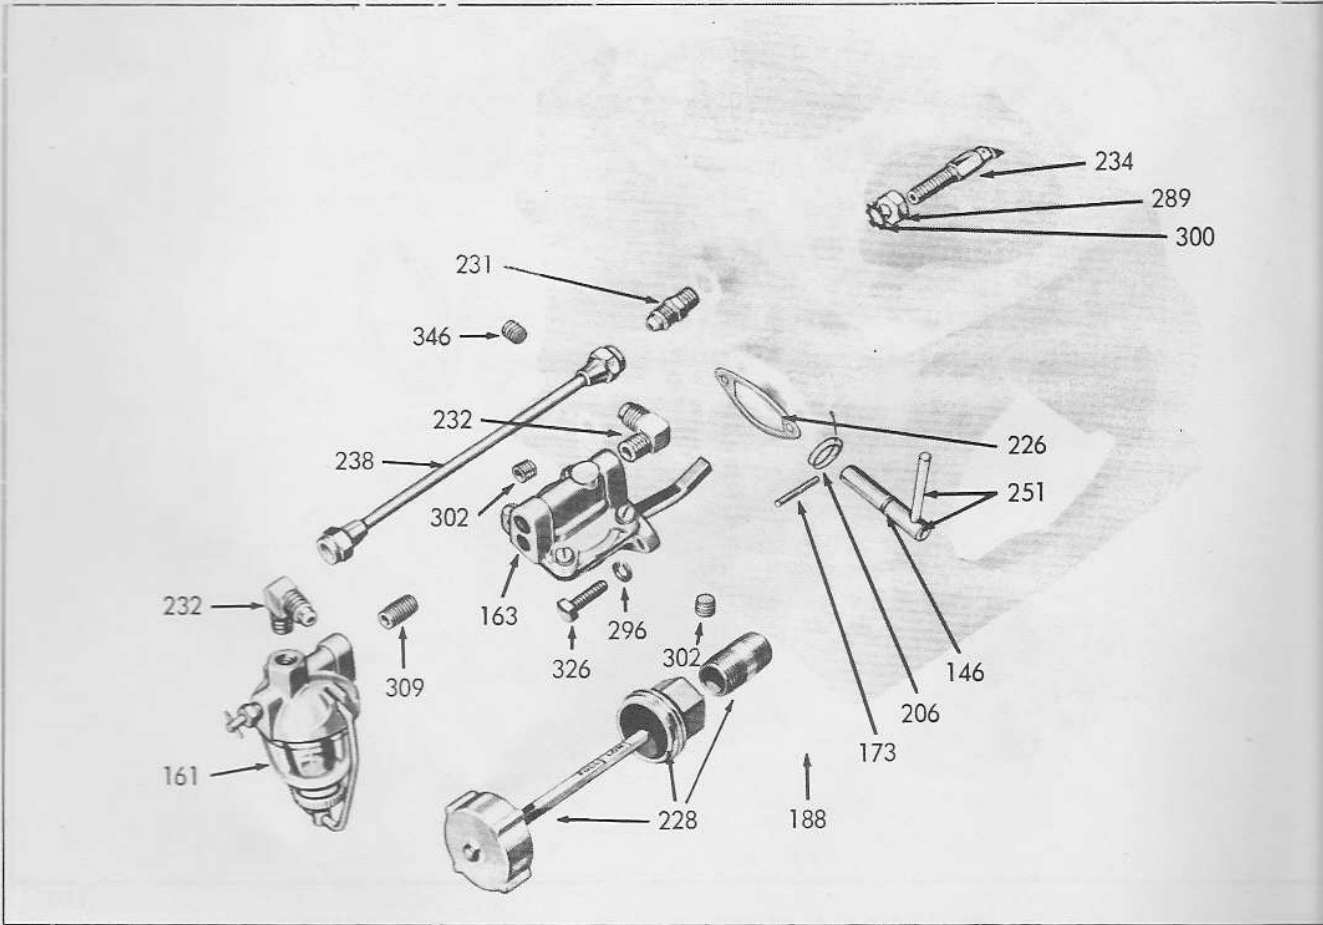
, FUEL PUMP, OIL GAUGE AND OIL SPRAY NOZZLE GROUP
